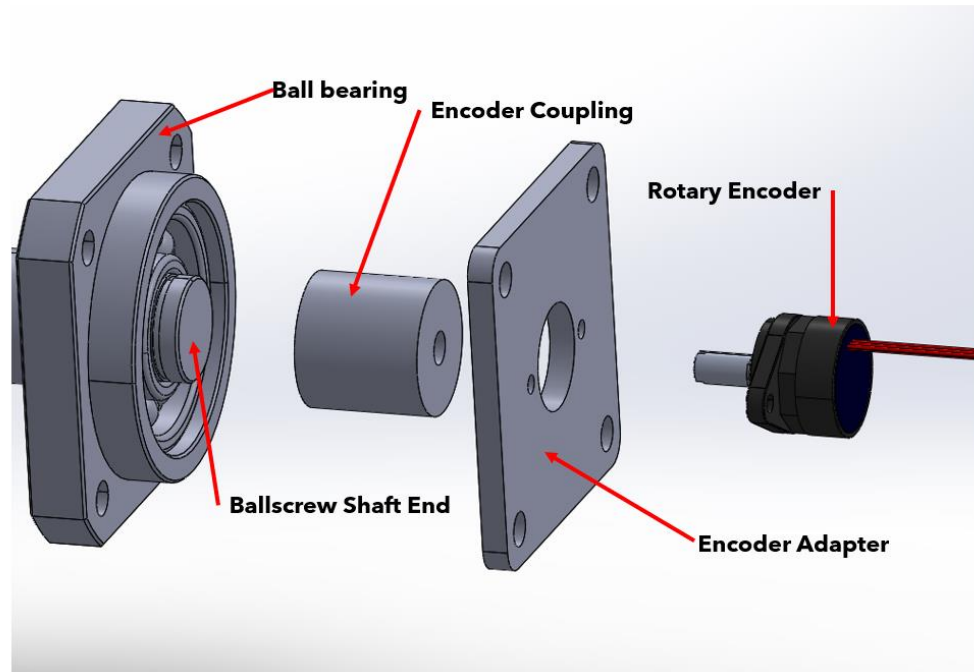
Encoder mounting scheme from rotary encoder to ballscrew shaft.
